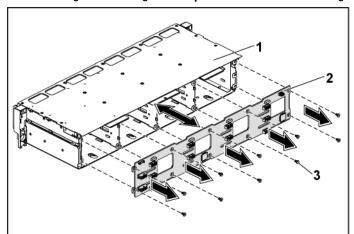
Removing and Installing the Backplane From the Hard-Drive Cage
